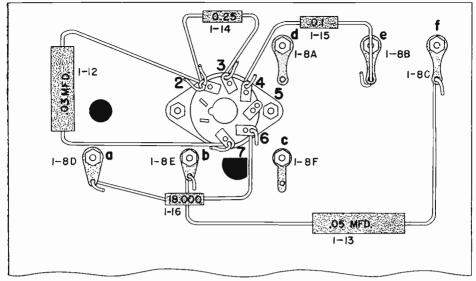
The five radio parts which you connect to lugs in Experiment 9 are shown here ready for soldering. If you prefer, you can prepare all the parts in this manner, and then solder all the joints at once instead of soldering each part separately as called for in the experiment. WARNING: Bends in resistor and condenser leads should be gradual (not sharp), and should begin at least one-quarter inch away from the body of the part; otherwise, the leads will break off.
